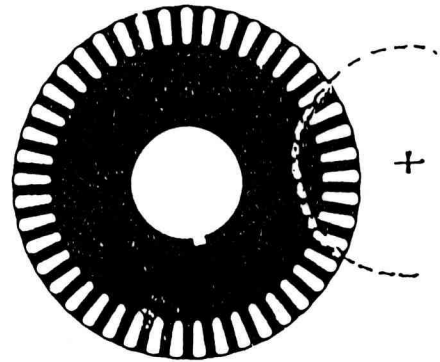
Partial cutting of Rotor Bar by Milling Cutter
